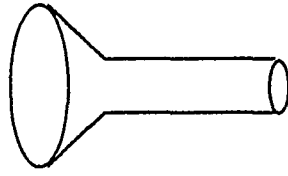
Schematic drawing of a rivet in airplane fuselage.
